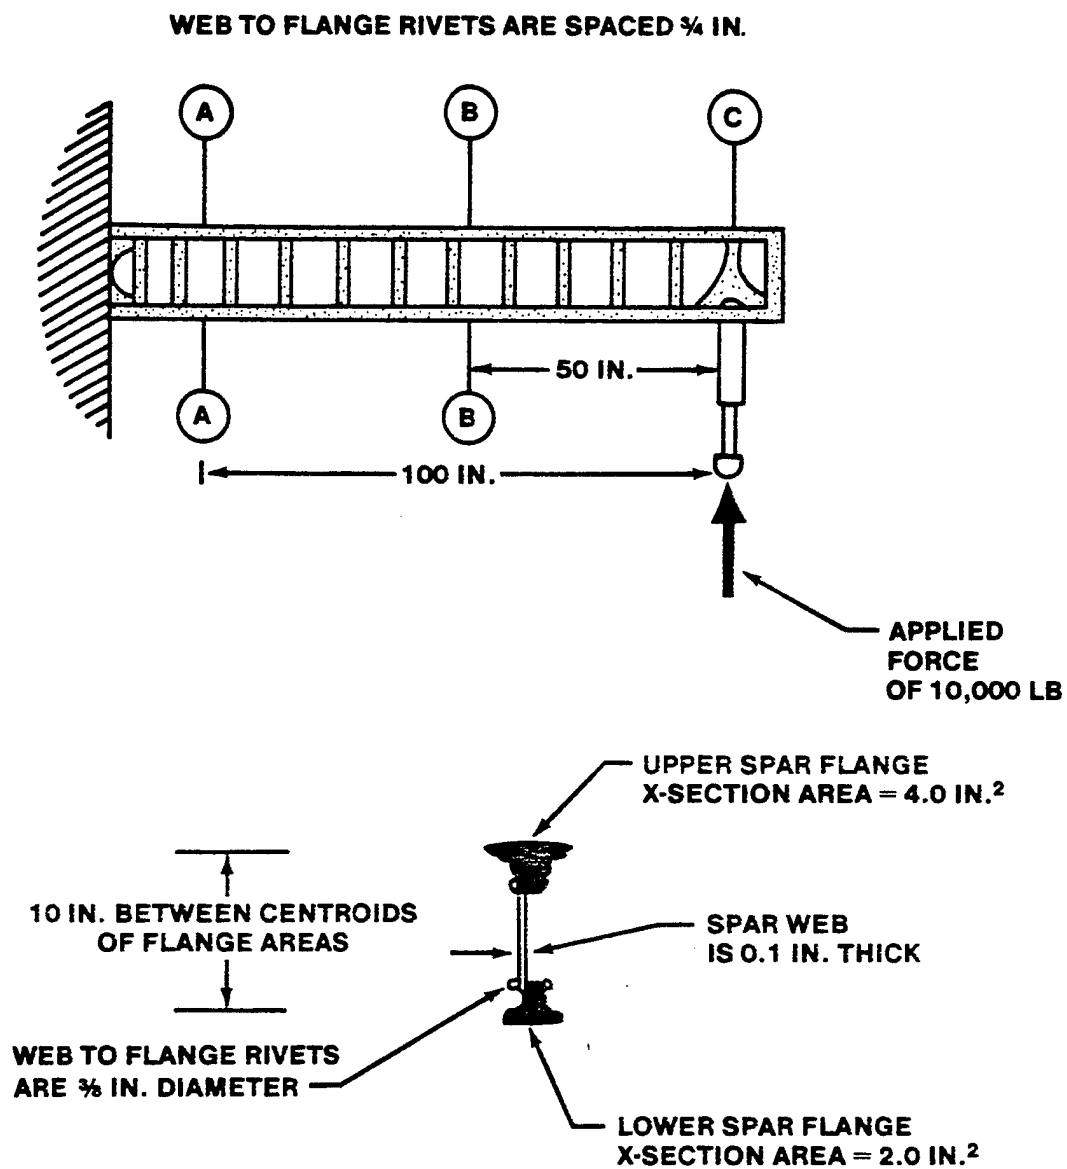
TYPICAL BEAM STRUCTURE
